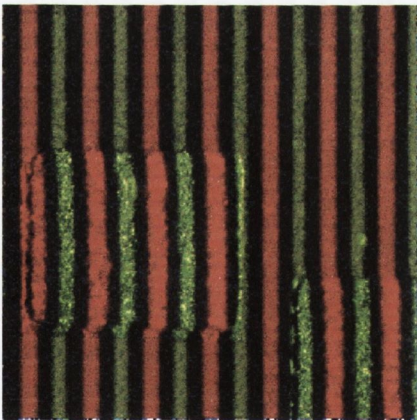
The original image with colour pattern of the solder paste in the PCB
